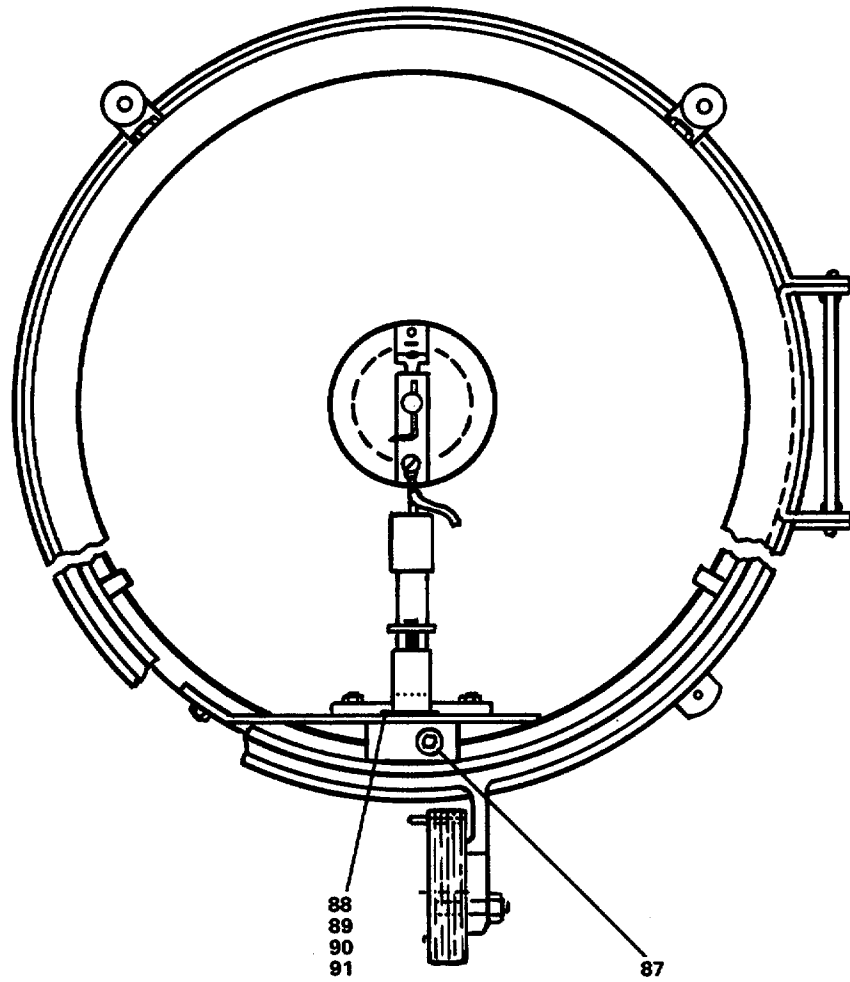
Replace/Repair Drum Assembly (Sheet 3 of 4).
